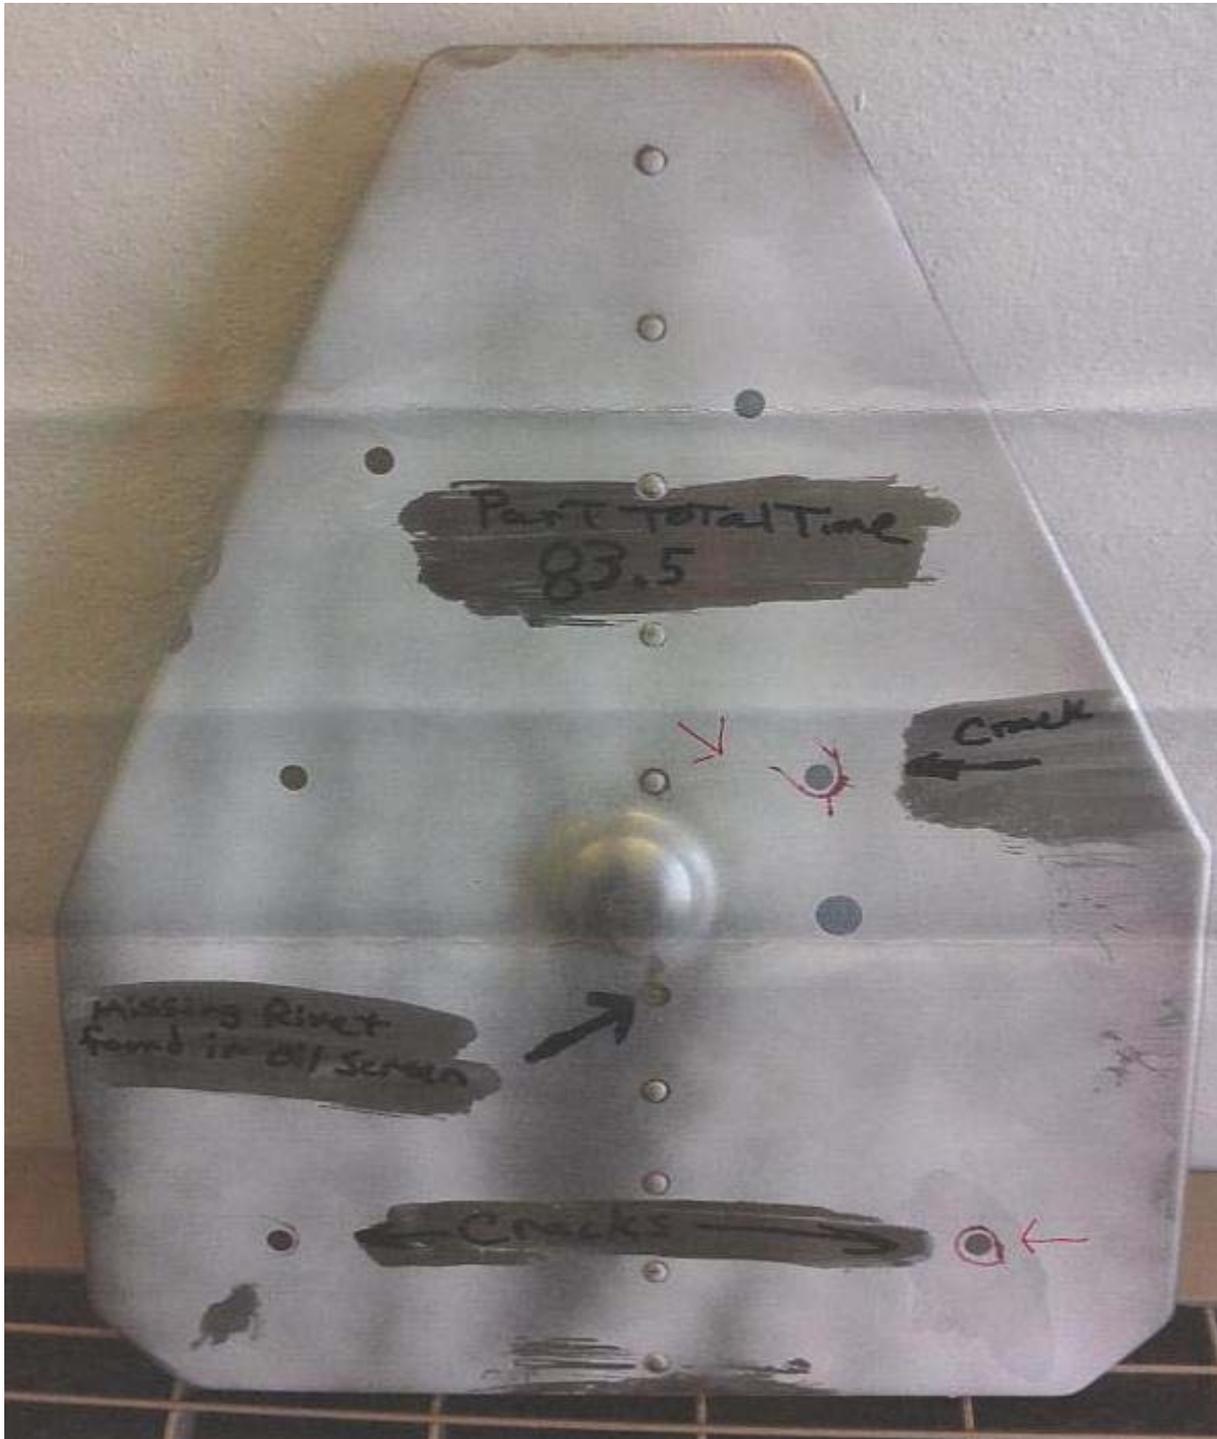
OIL SUMP AND INDUCTION HOUSING ASSEMBLY
